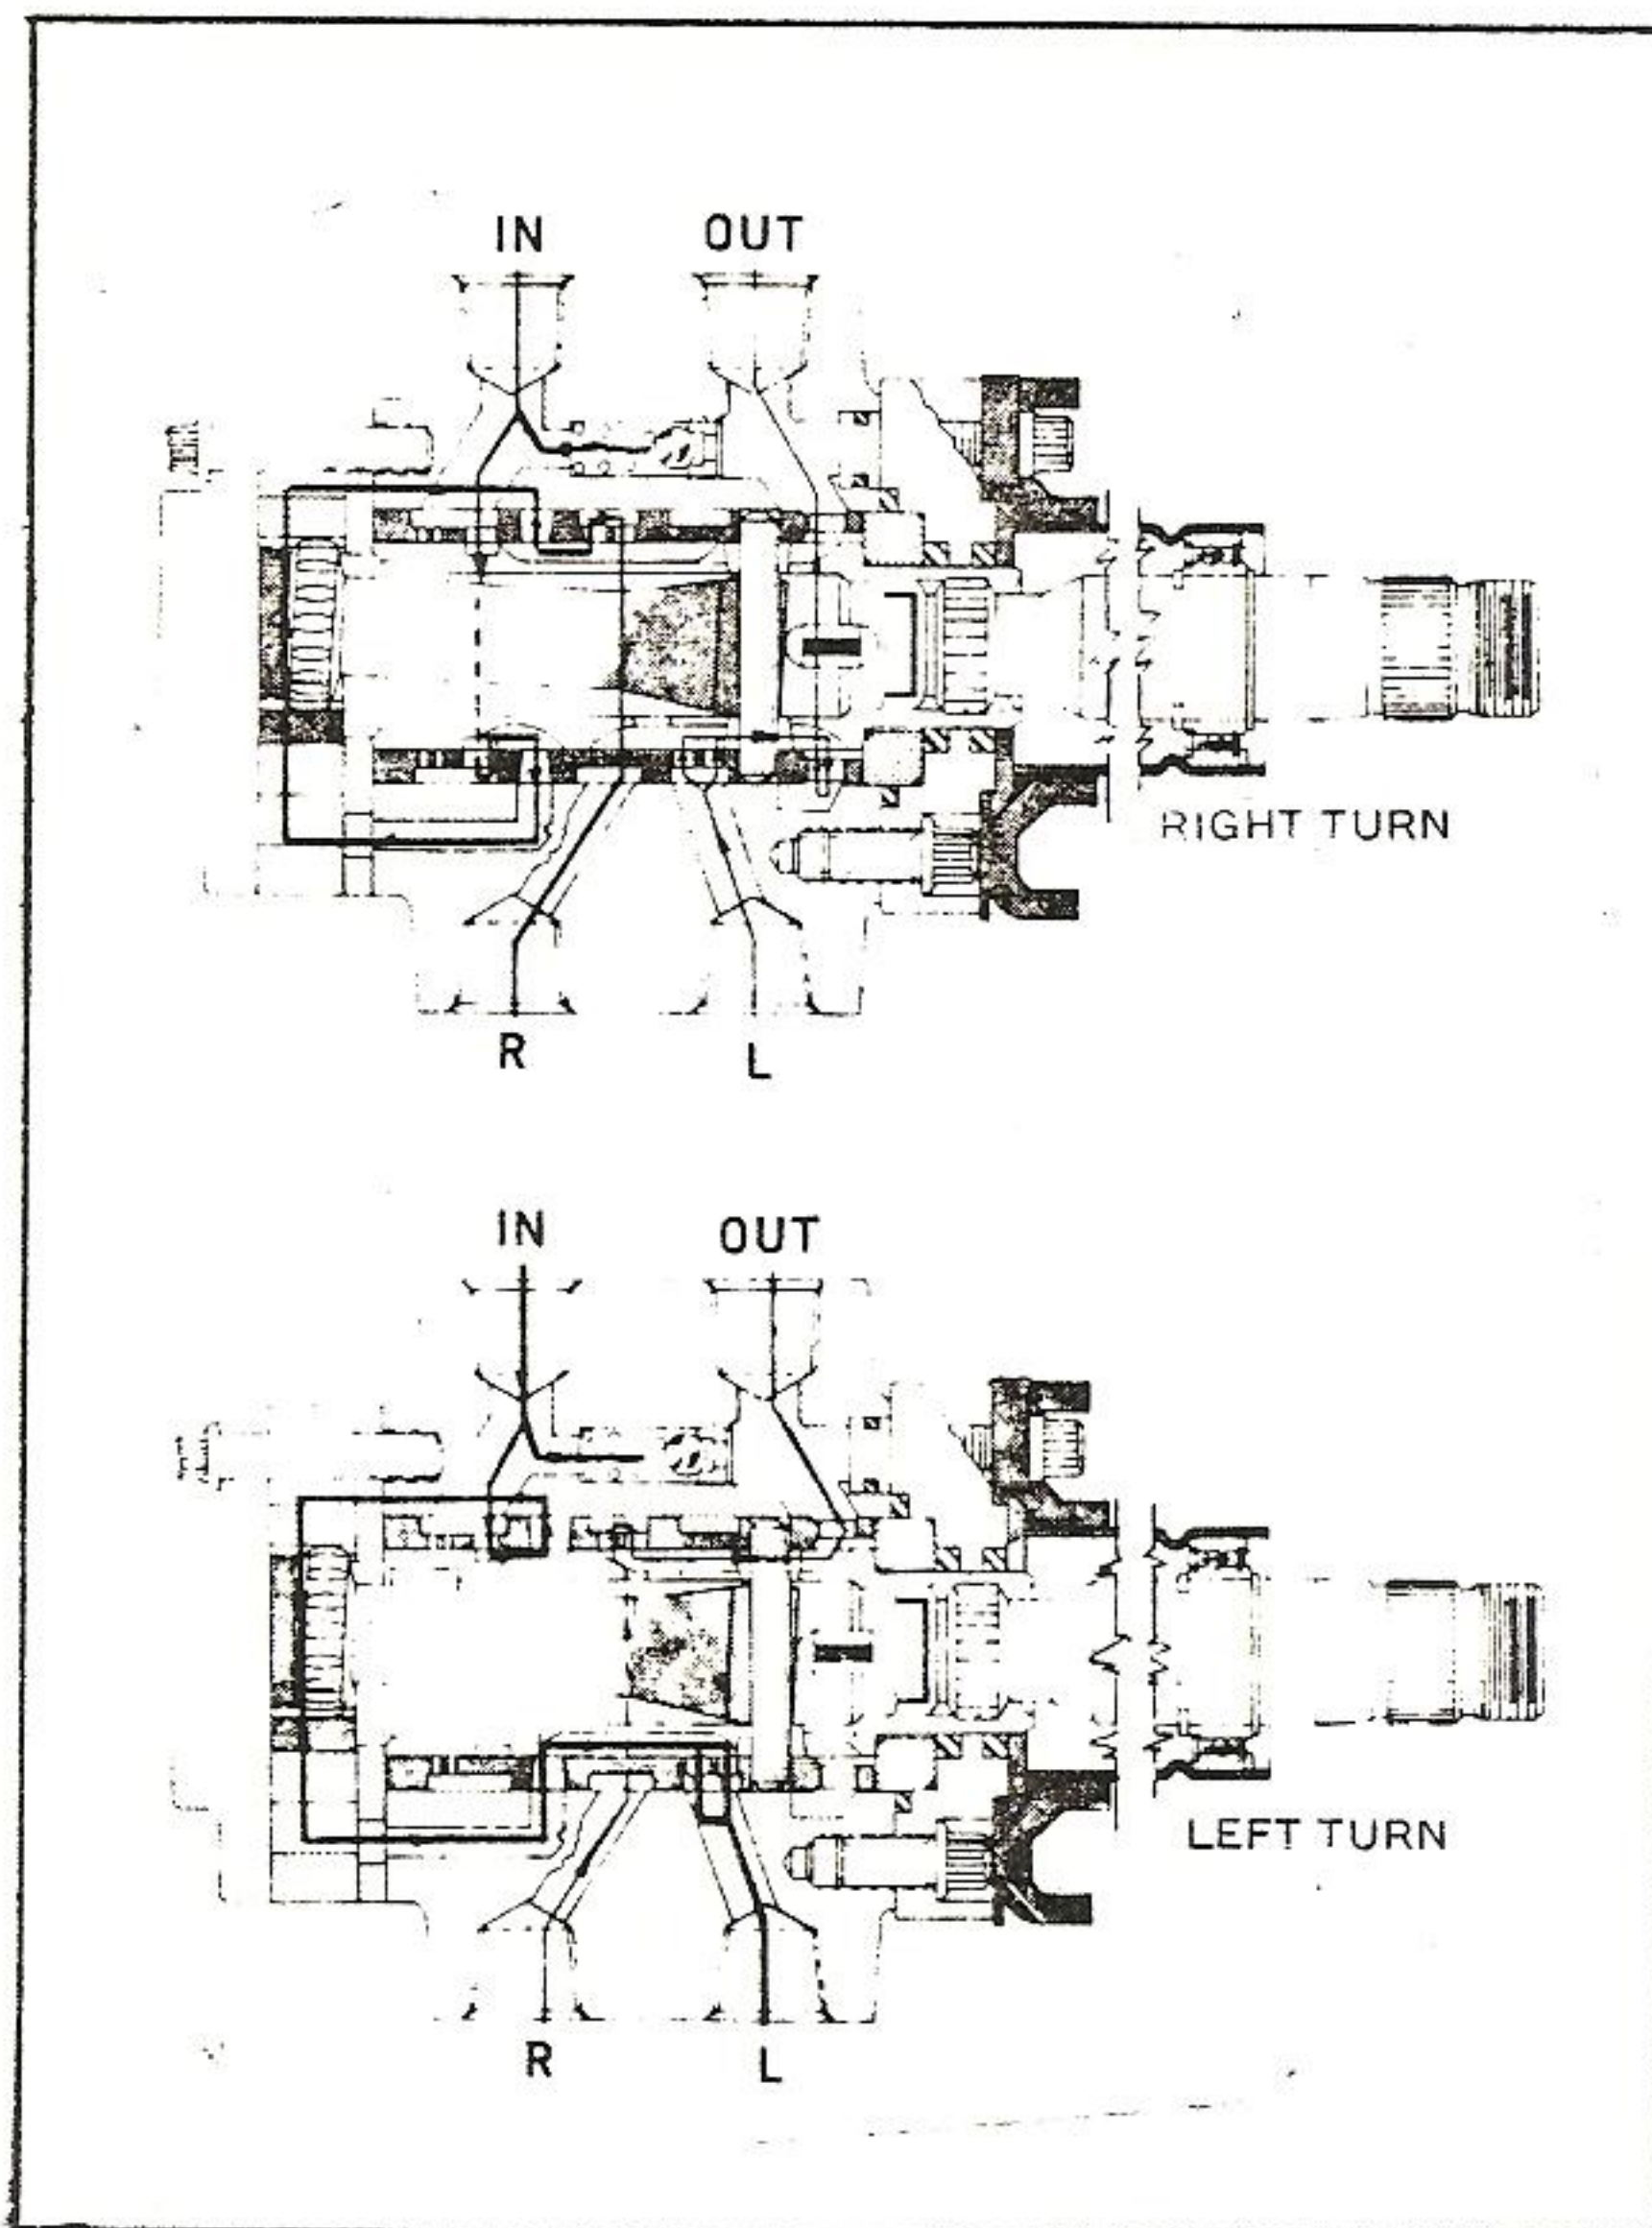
5. STEERING UNIT (RIGHT AND LEFT TURN POSITION)
